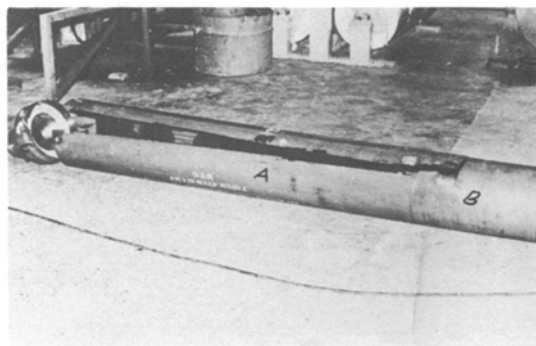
Propulsion cylinder – crack propagation along the longitudinal weld – adjacent to the weld bead.
